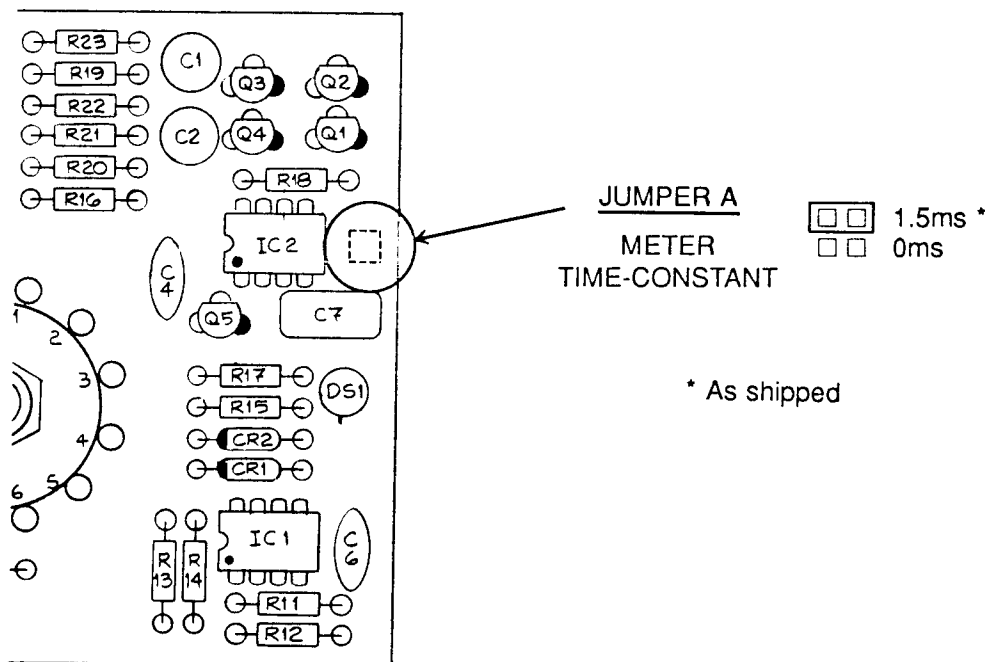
Jumper positions, 8185A Stereo Generator Meter Resistor Board
